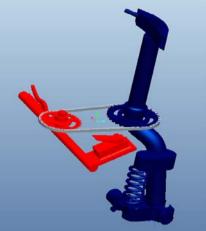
PRO E Design of the entire Dual Steering system
